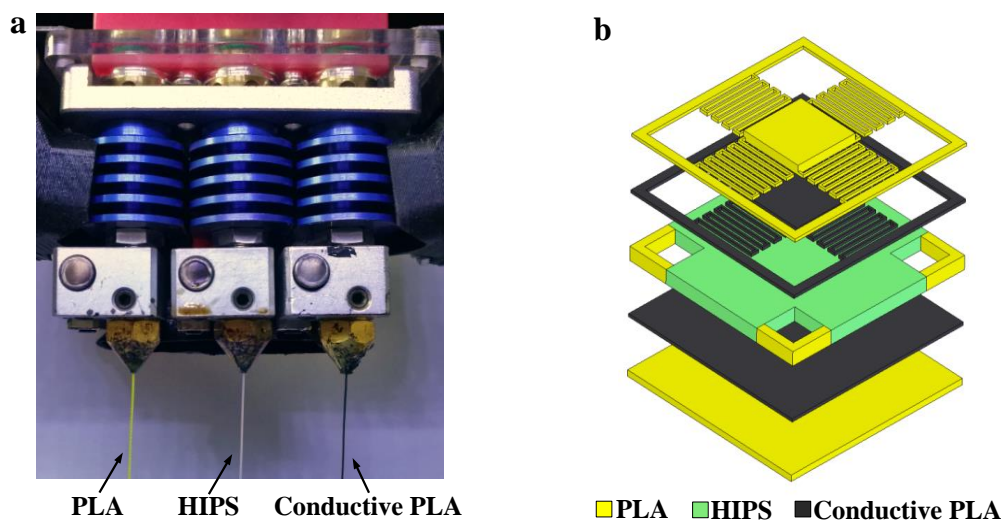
Photograph of the triple-extruder 3D printer and 3D model slicing. (a) Photograph of the triple-extruder 3D printer. (b) Exploded view of the functional layers of the capacitive force sensor for integrative 3D printing.
